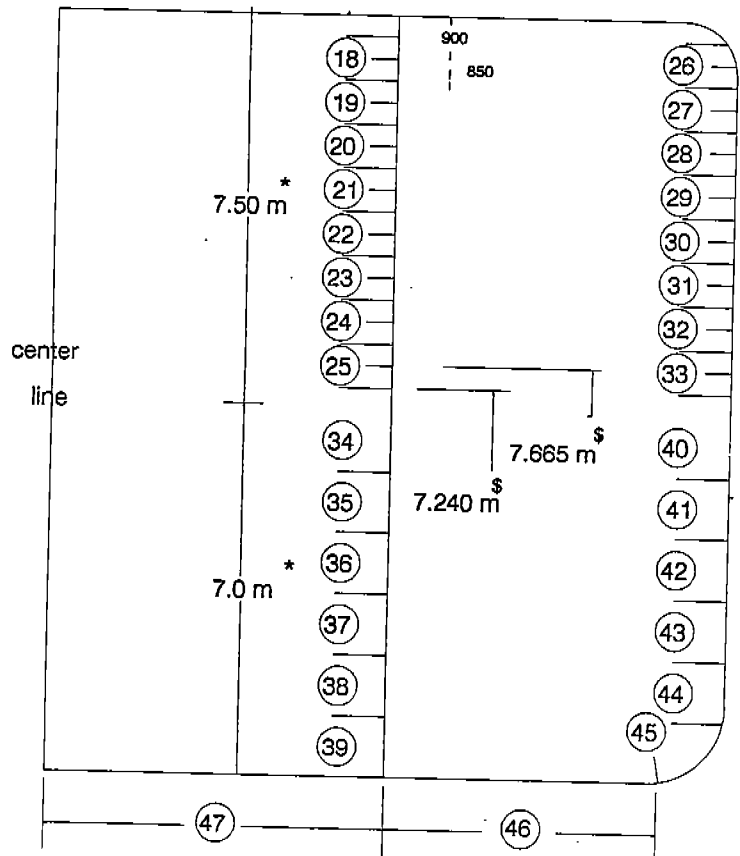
(c) Model C : Typical Tanker Section - Panel Numbering continued
